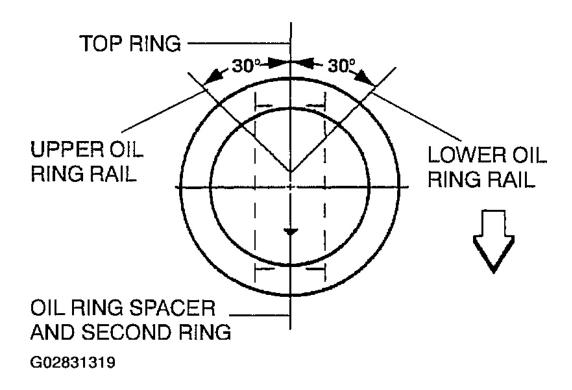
Positioning Piston Ring End Gap Courtesy of MAZDA MOTORS CORP.
